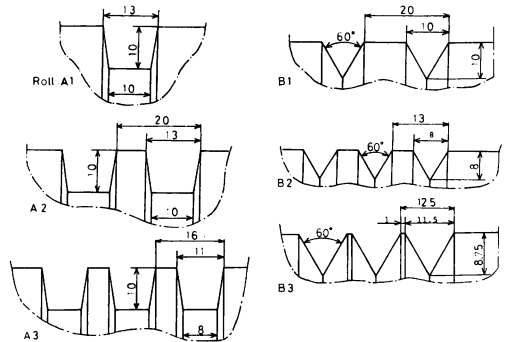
Types and dimensions of the grooves formed on the upper rolls ( Ref. Fig. 3 )
